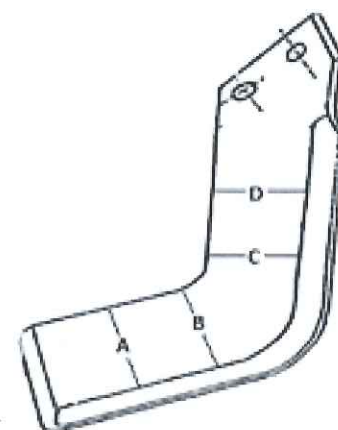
DIMENSIONS OF BLADE FOR WEAR ANALYSIS
